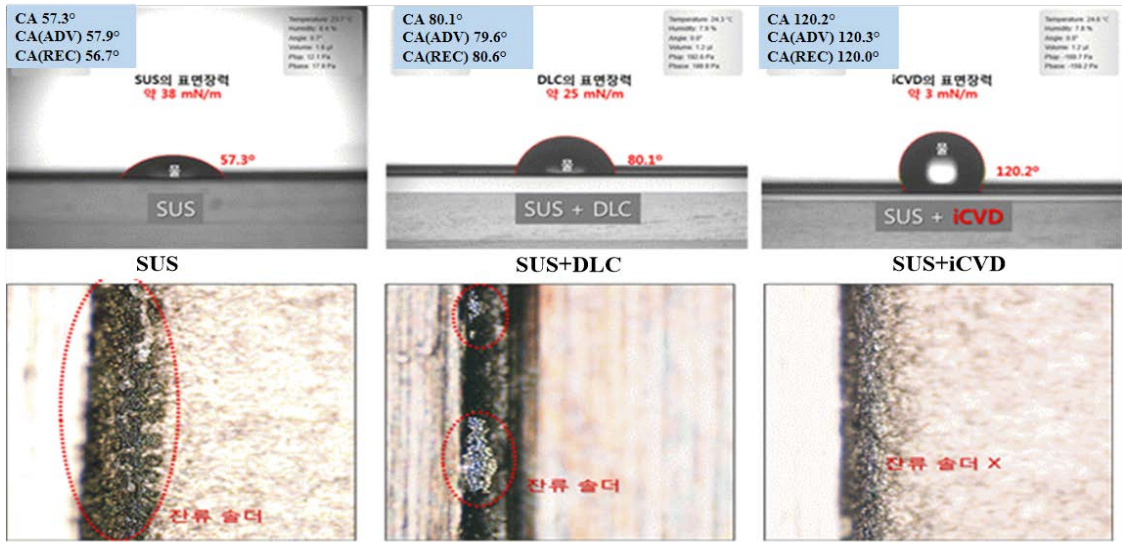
Stencil contact angle and blade residual solder measurement.
